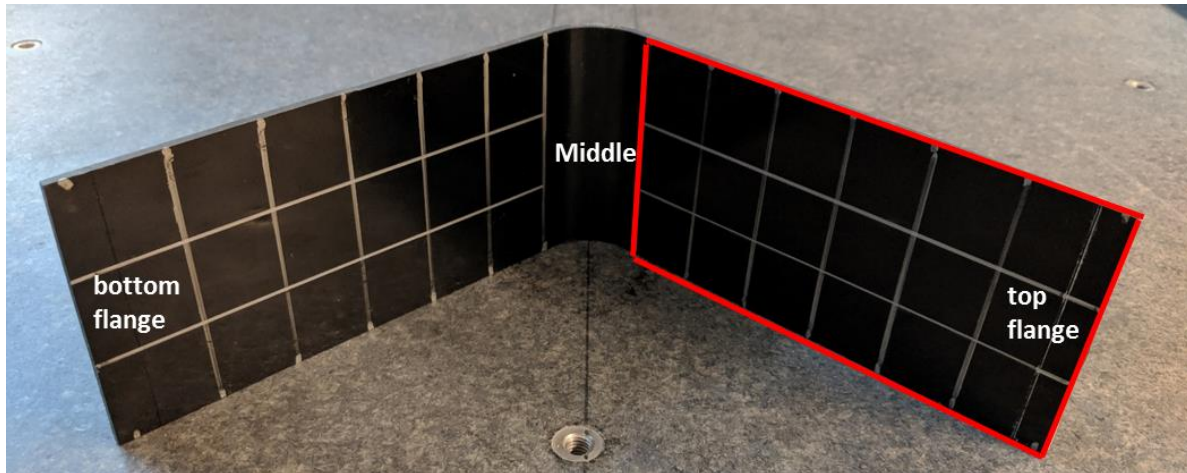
6-inch L-shape with 1-inch by 1-inch grid marked on the tool side, ready for thickness measurement
